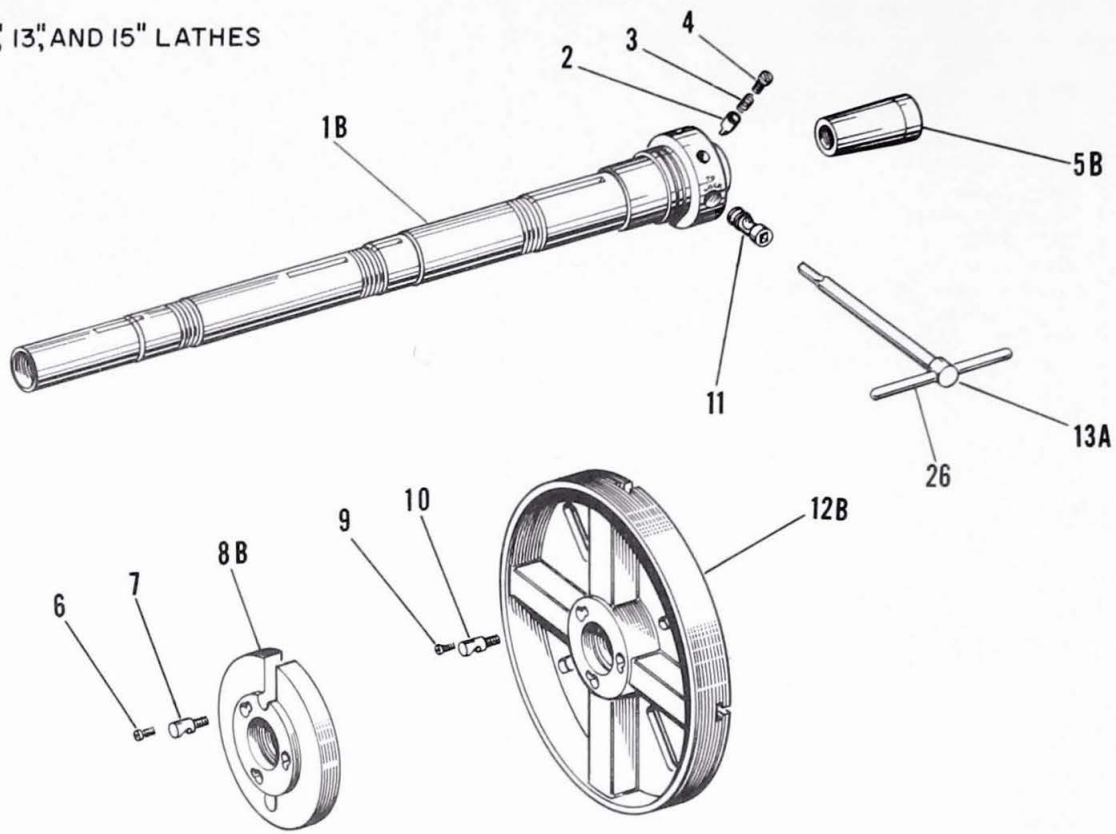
Headstock Spindle Assembly ("A" Shaft)
